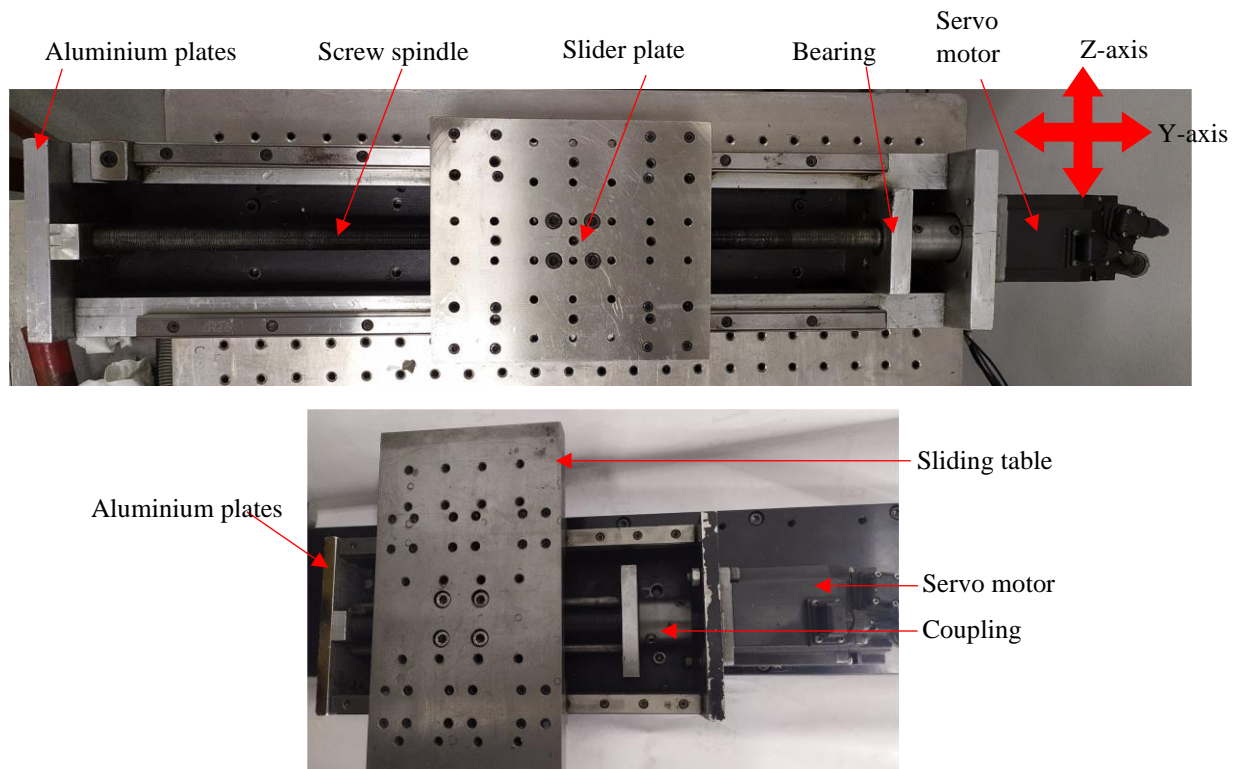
(a) Horizontal Y-axis linear slide which holds the Z-axis slide and (b) Z-axis slide with slider plate to hold the newly developed magnetorheological grinding tool.
